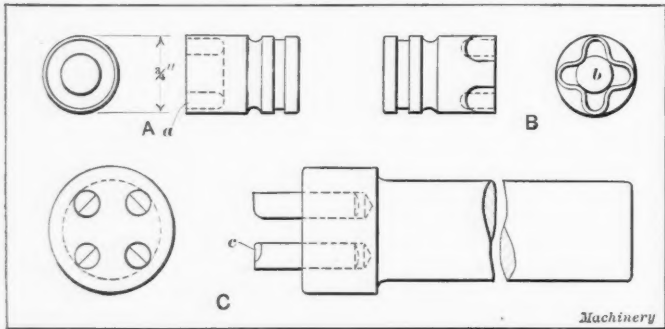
An Irregular-shaped Shell and the Forming Tool used
